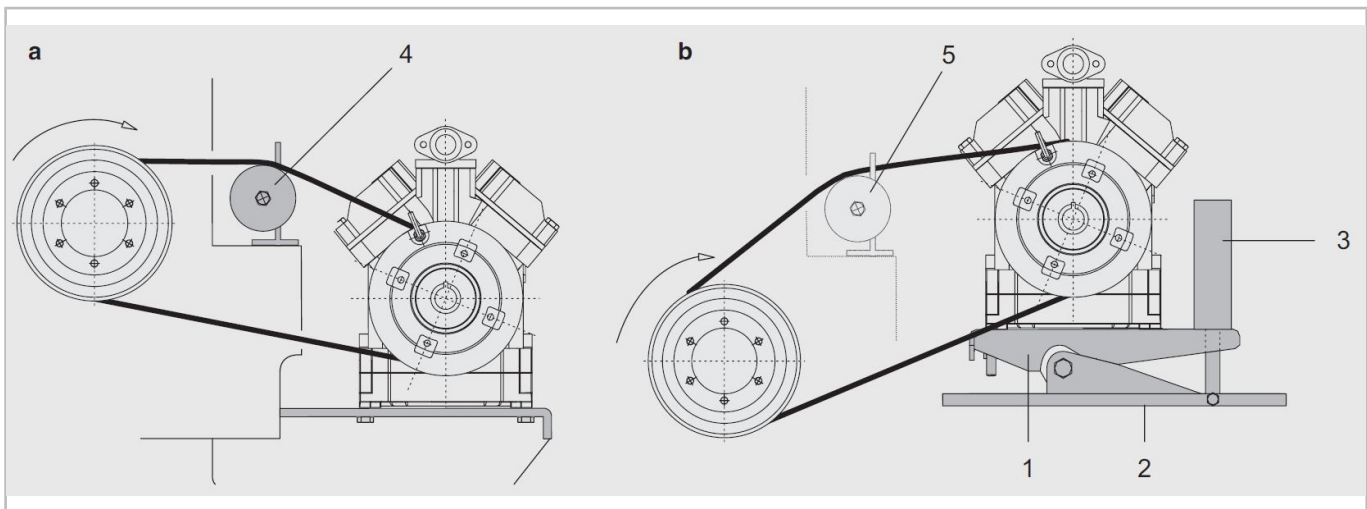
Mounting a compressor with V-belt drive (schematic representation): a) solid mounting to the motor, b) torsionally elastic mounting to the chassis
